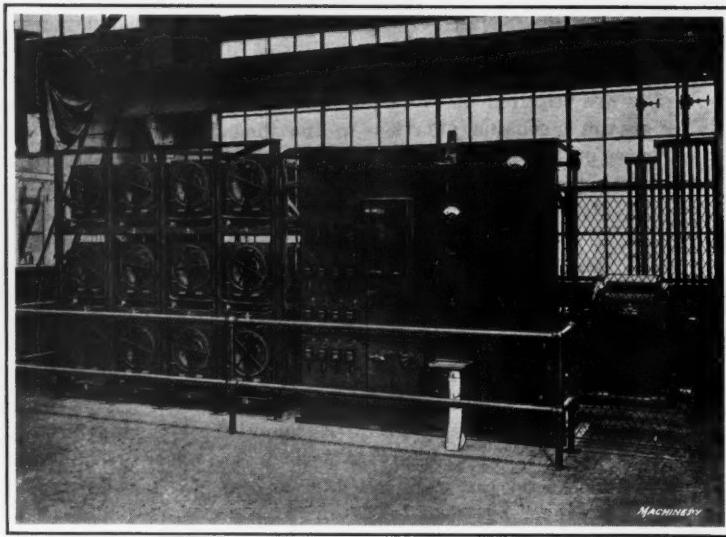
Welding Equipment, showing Part of Generator Set and Switchboard
